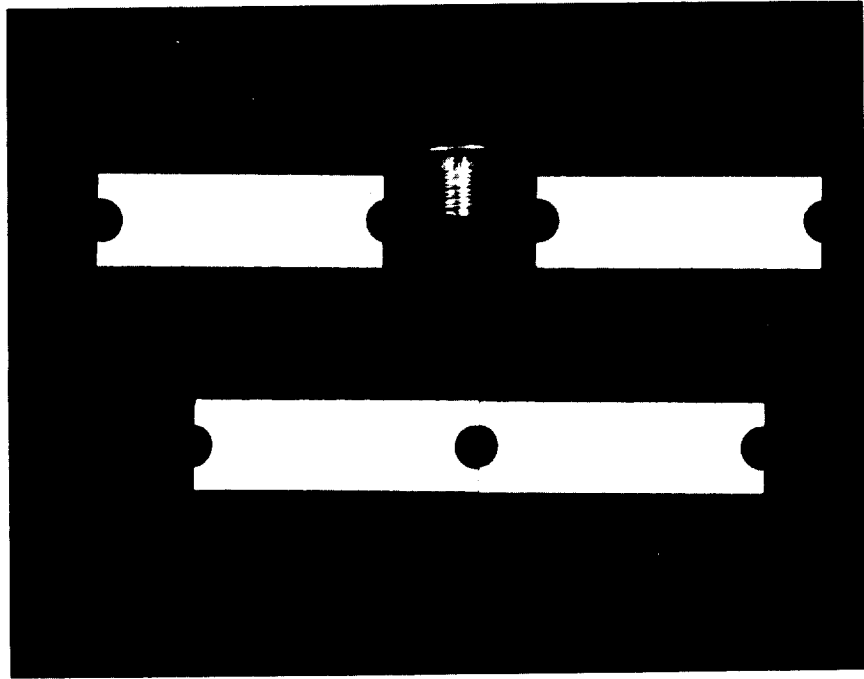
Four aluminum multipurpose sample substrates and a reworked flathead machine screw. Samples are mounted on holder end-to-end as shown by bottom two substrates.
